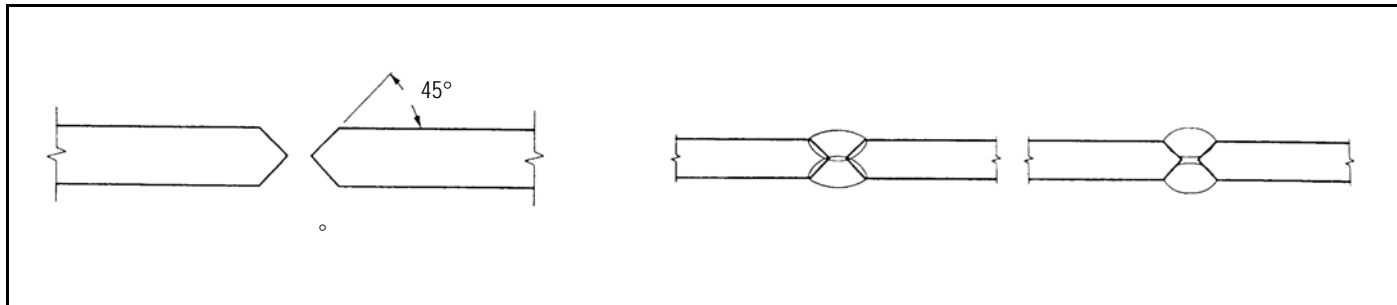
Frames – Preparation of Joint for Welding Extension
